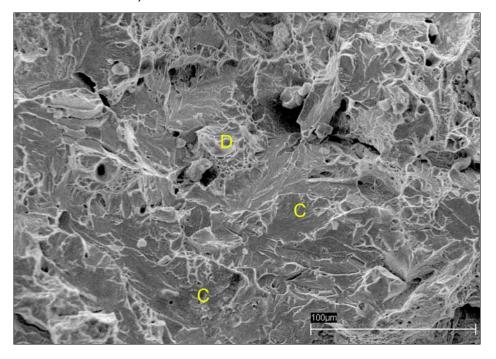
Figure B: View of the fracture surfaces from each half of the compression rod
